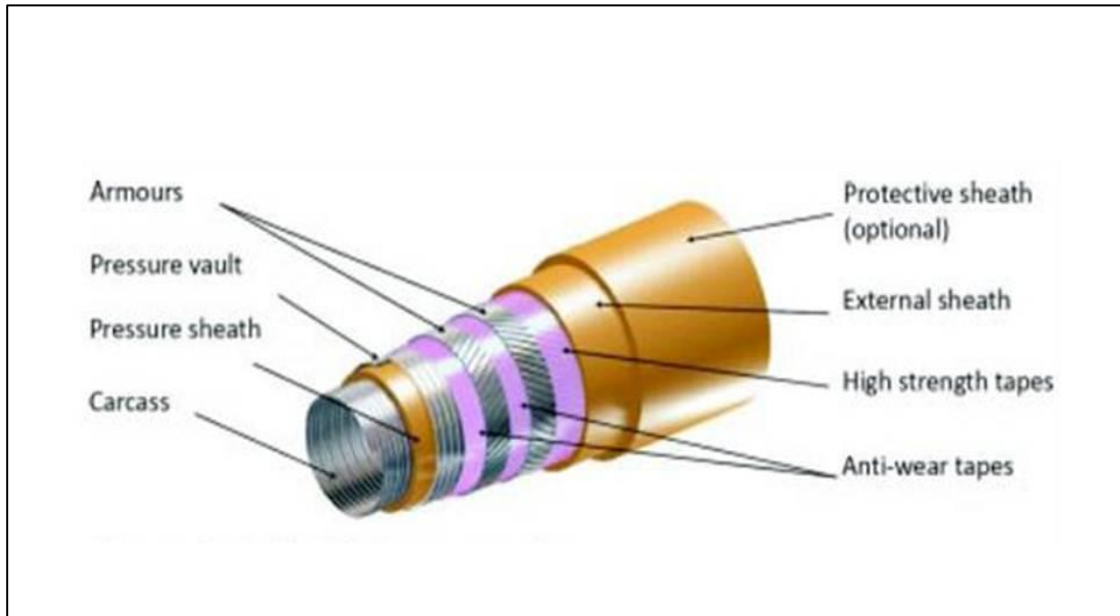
Typical flexible riser pipe structure. (Ismail, 2014)
